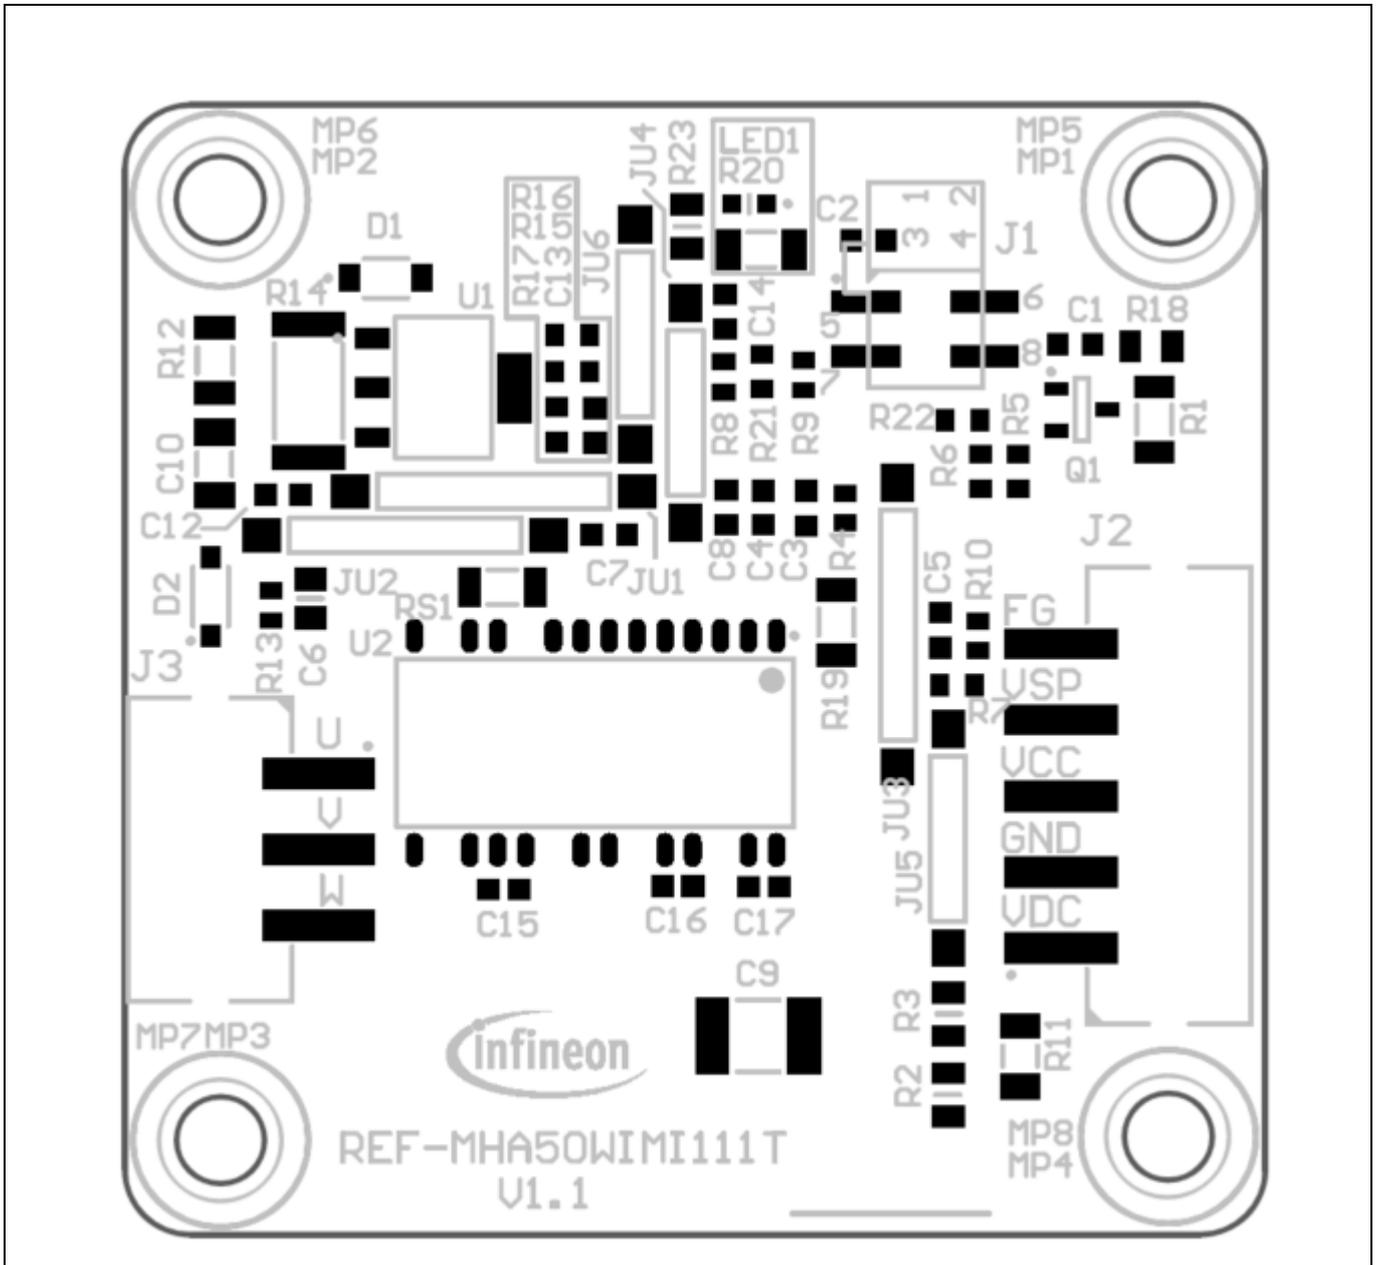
Top assembly print of the REF-MHA50WIMI111T reference board
